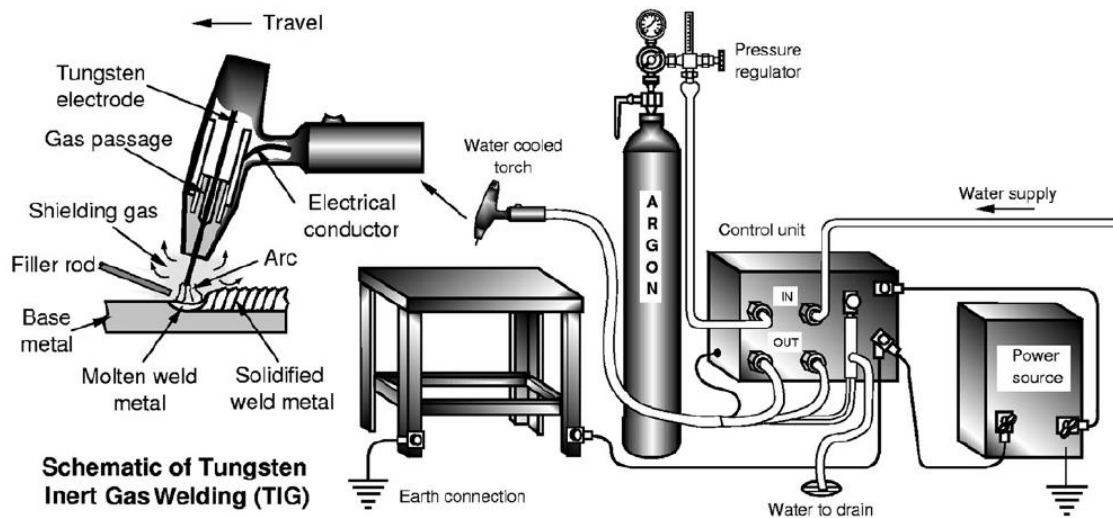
Tungsten Inert-gas Welding Equipment (Swift & Booker, 2013)
